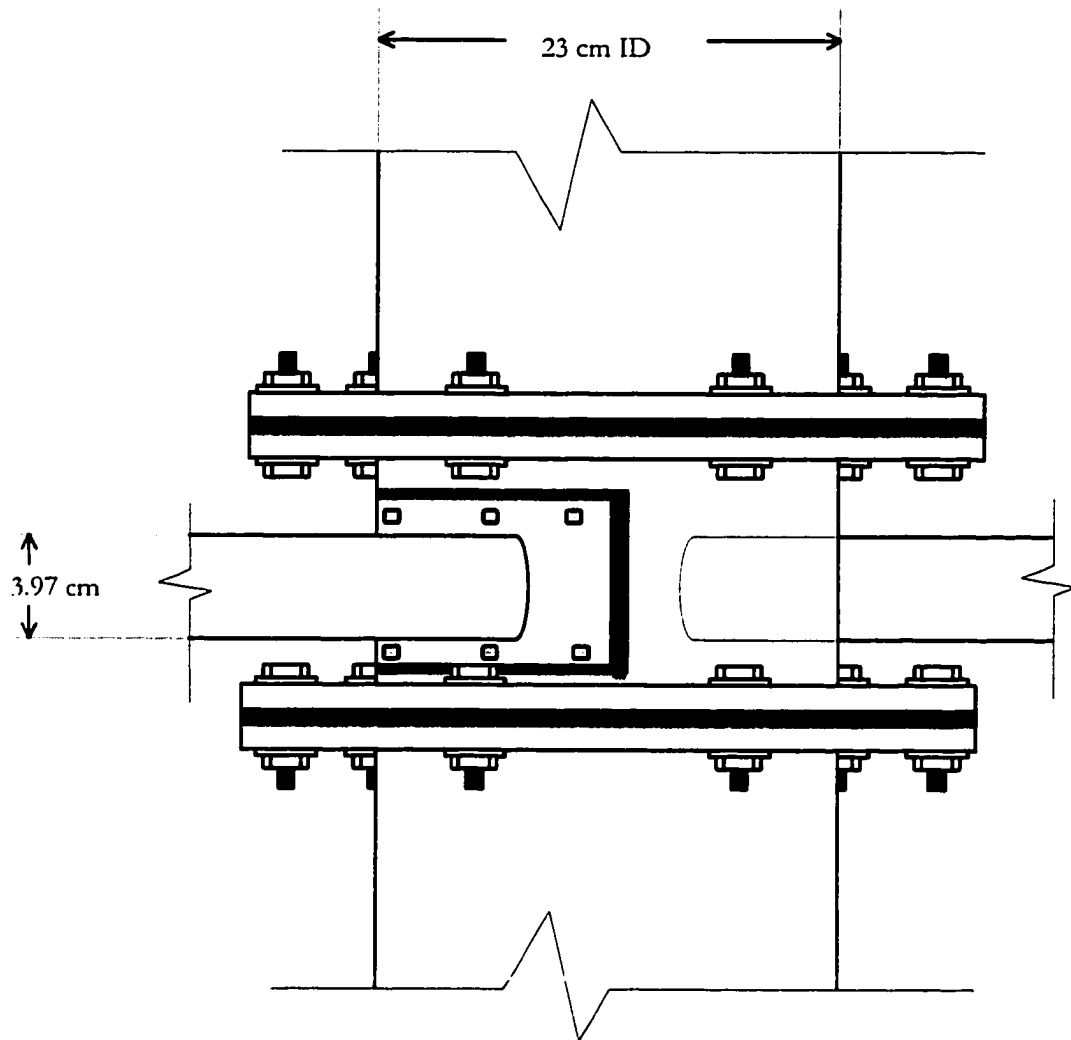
Schematics of SA port assembled on the riser with mounted injector nozzles.
